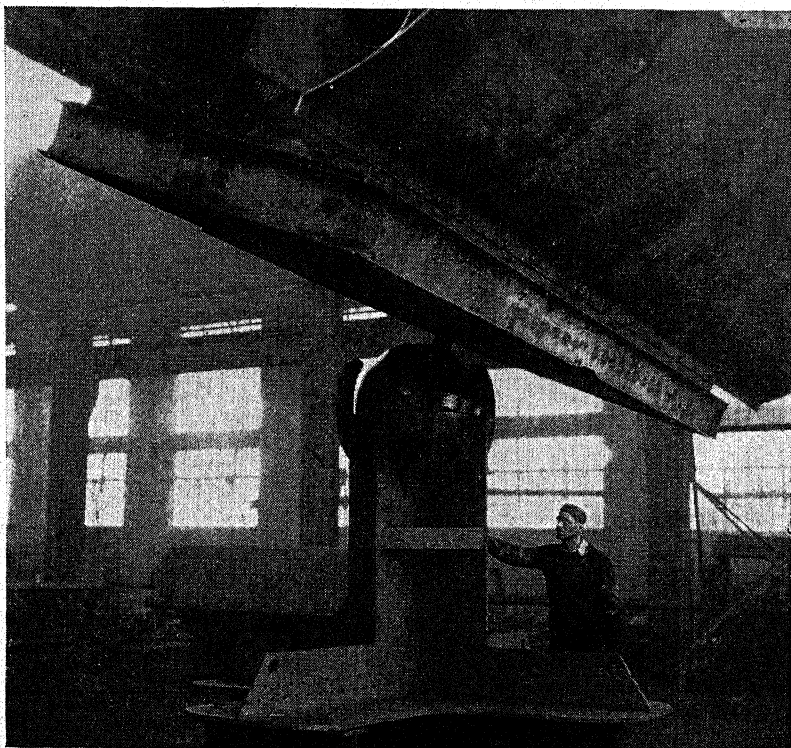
Ball and socket jig for positioning tender tank to permit all welding in down hand position.
